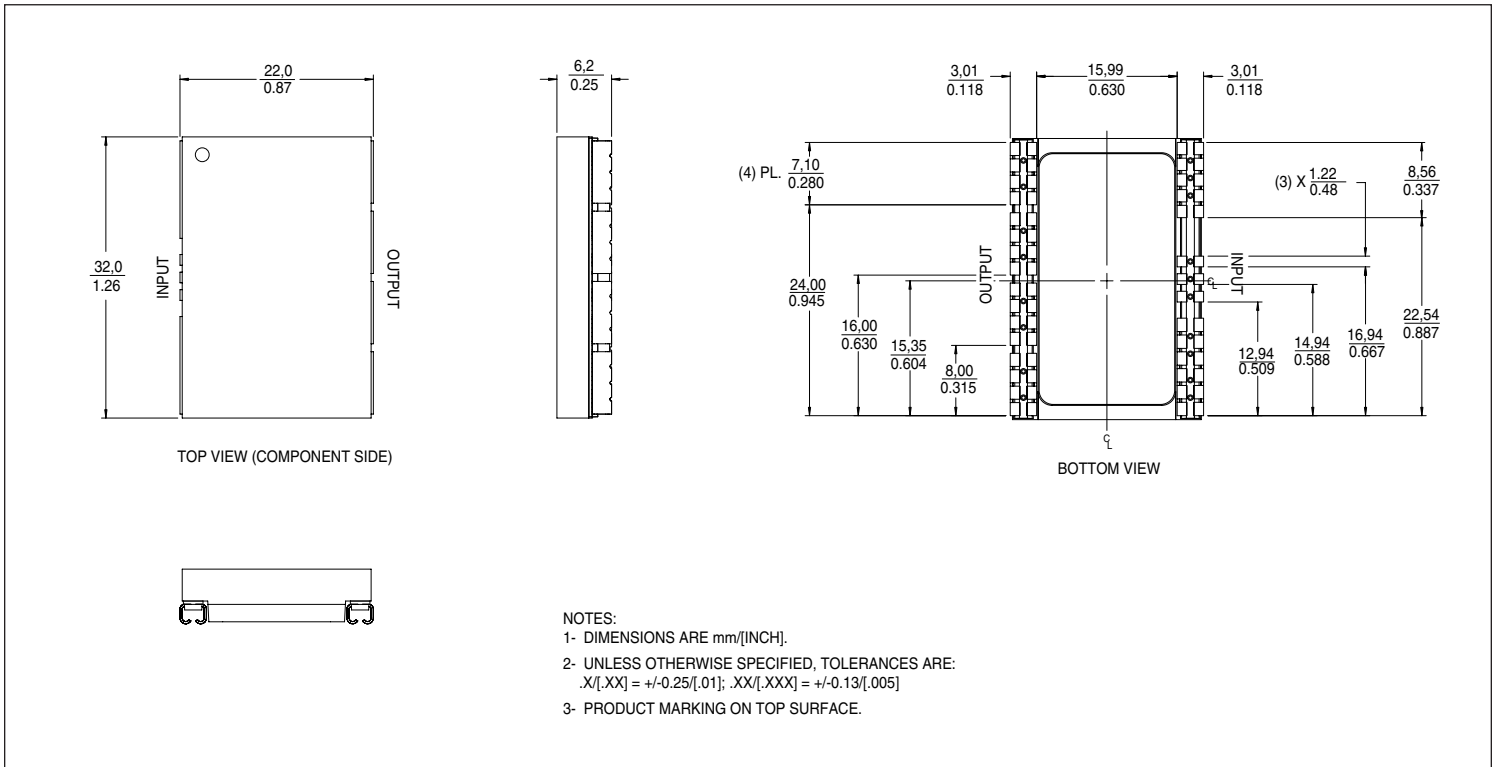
BCM J-Lead mechanical outline; Onboard mounting
